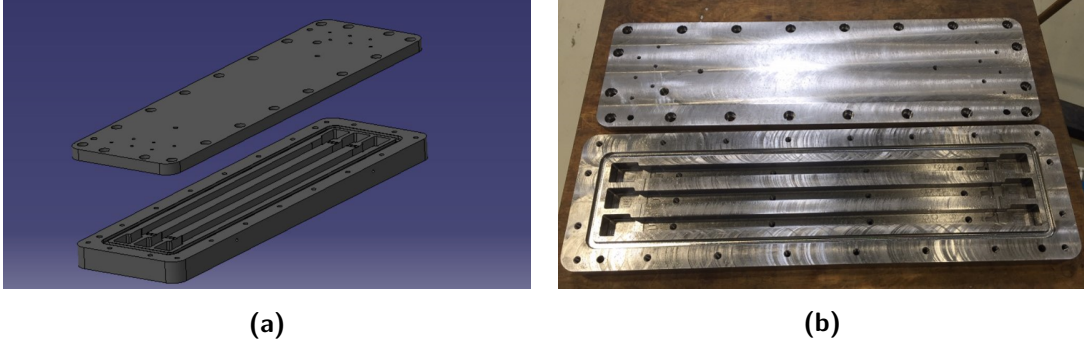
Design (a) and actual machined (b) impregnation mould used for the 4 cable stacks impregnation campaign.
